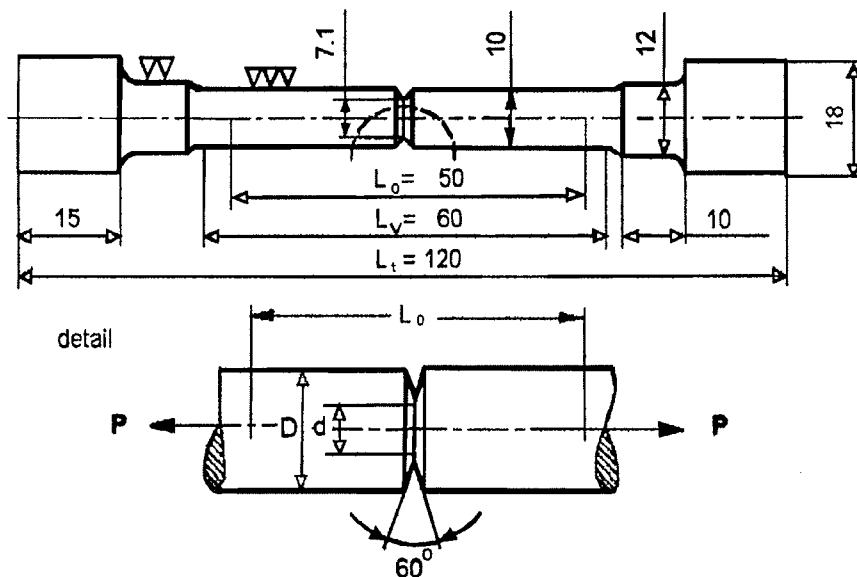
Circumferentially notched and fatigue-precracked K_{Ic} -test specimen; all dimensions are in mm.
